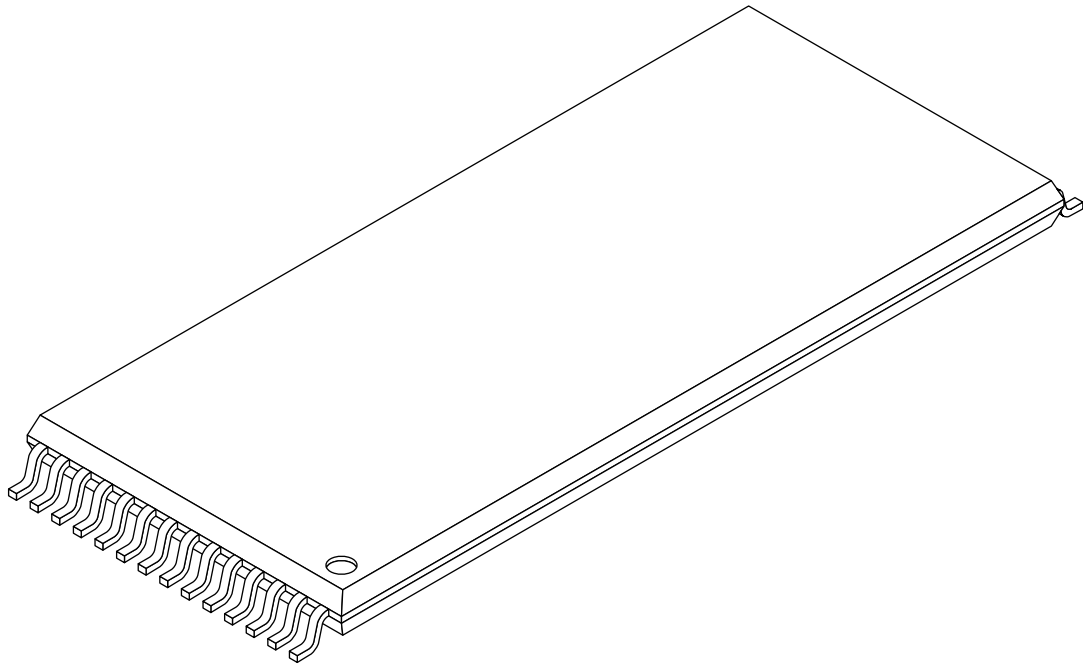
28-Pin (8 x 20 mm) TSOP (Type I) Package Dimensions
